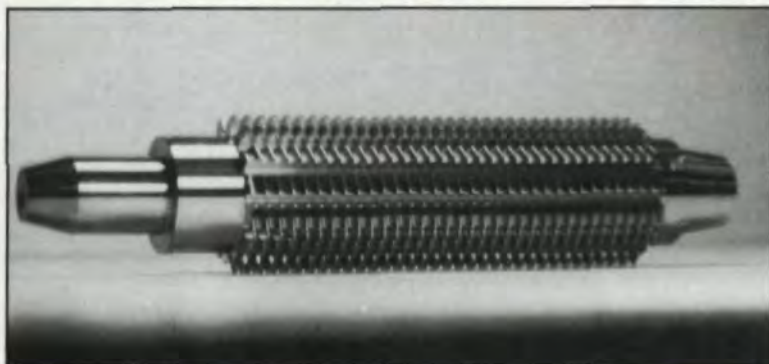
Star Cutter's small diameter hob with limited sharpenings. (Courtesy Star Cutter Company.)
